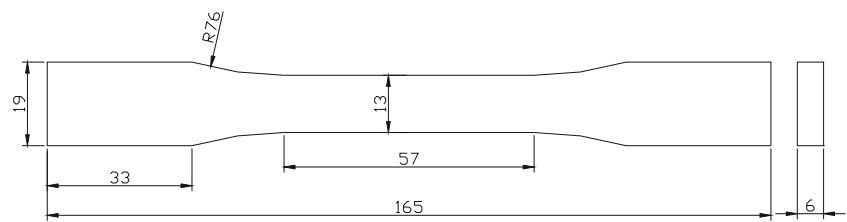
Dimensions of the tensile test specimen as per ASTM D638
